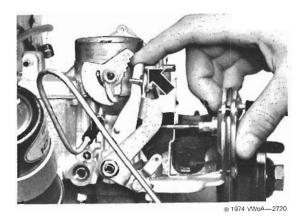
Fast idle lever being pulled back with fingertip until it contacts adjusting screw (arrow).
